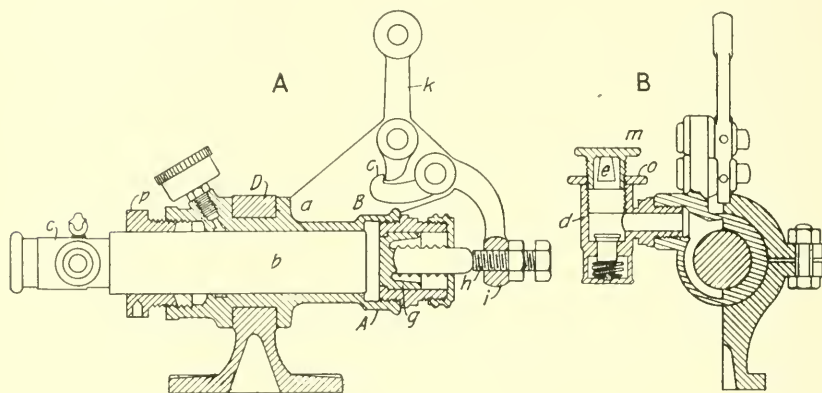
C. A. CALLM DEVICE FOR PREVENTION OF FLYWHEEL EXPLOSIONS
